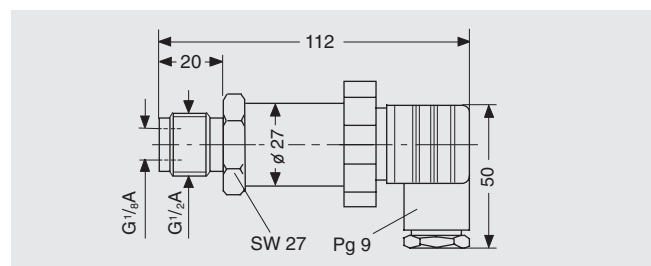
/165 Pressure transmitter 7MF1562, dimensions
